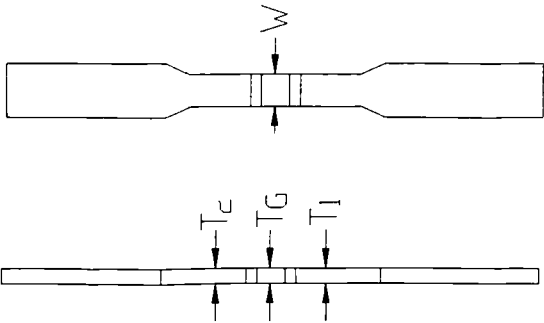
Schematic drawing of the tensile specimens in IMI 318 welds, specimens 6301 to 6324 (average of T_1 & T_2 equals the average plate thickness T_b)
